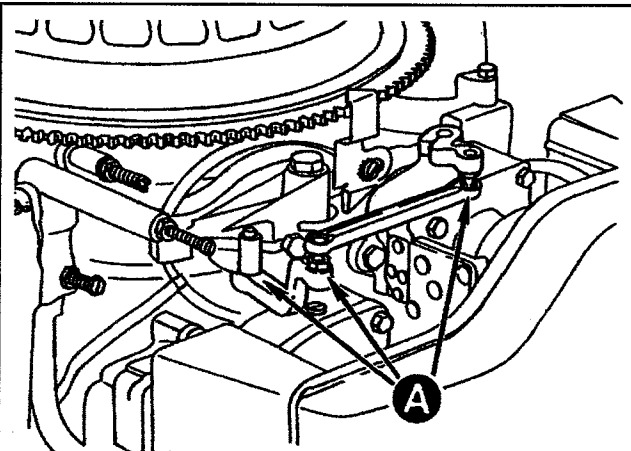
Carburetor lubrication points-carbureted 120-300 Hp (2000/3000/4000cc) V4/V6/V8 Motors
